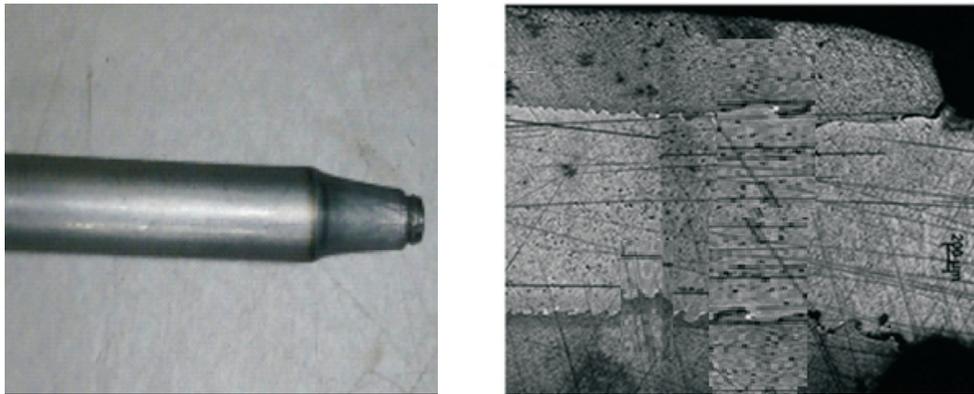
Welded fuel pin and microscopic image of weld interface.
